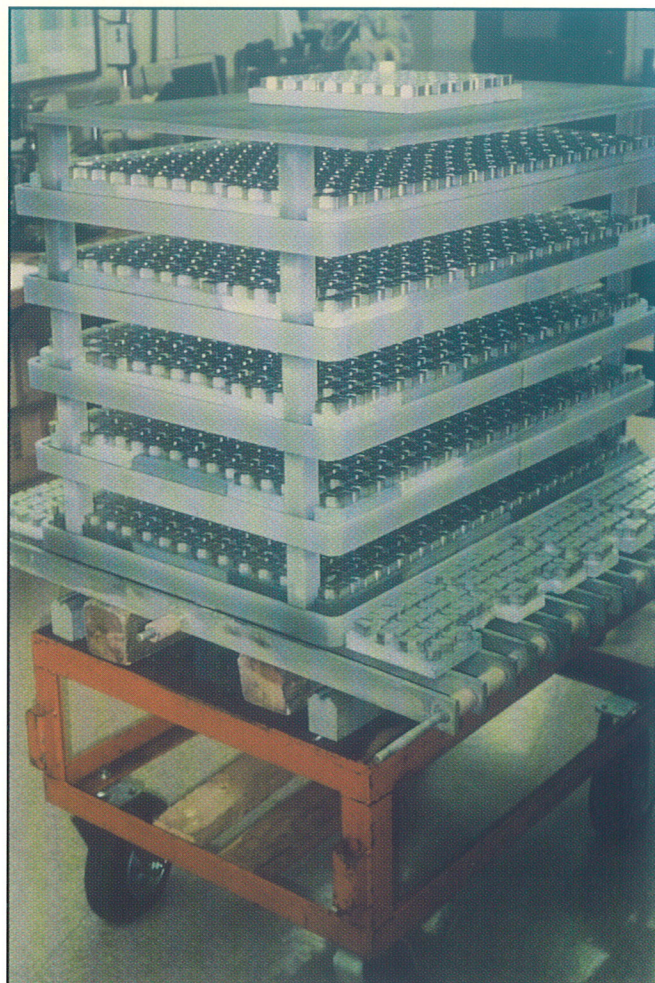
A load of stainless steel parts after sintering in argon atmosphere.
